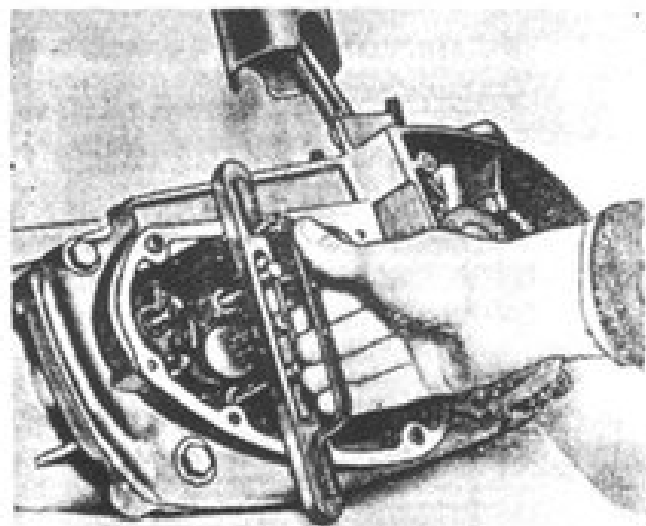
Determination of the gear shift shaft axial clearance, HЖ-II-3 motorcycle.
